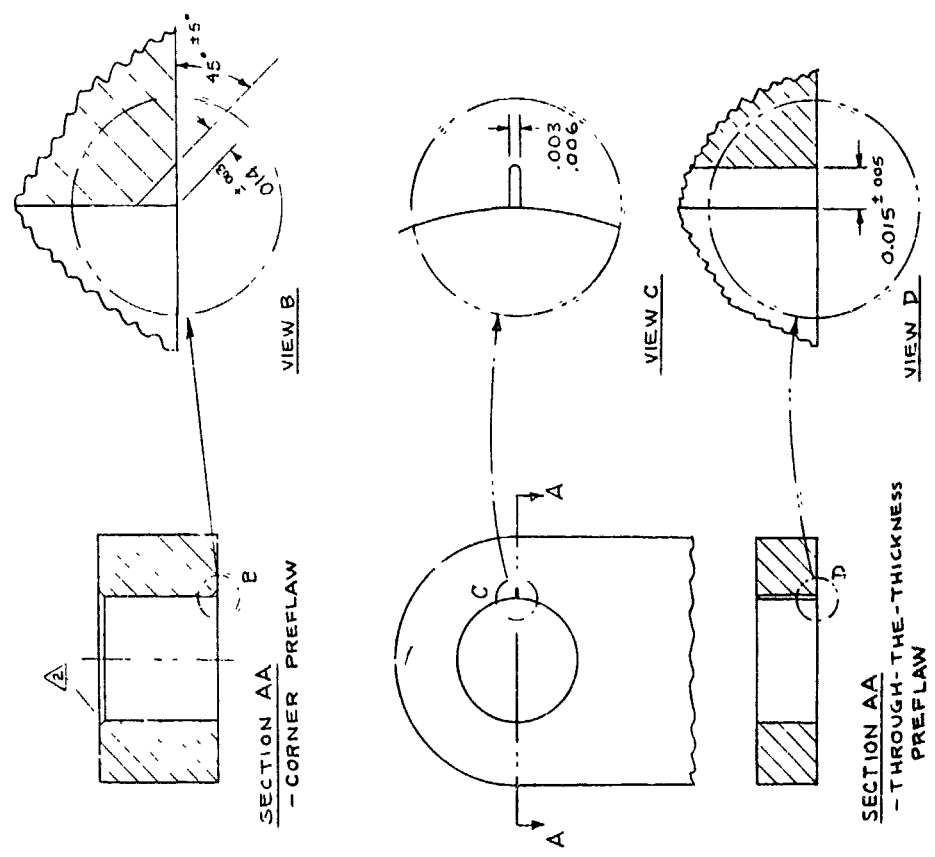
Specifications for Machining EDM Notches (Flaws)
